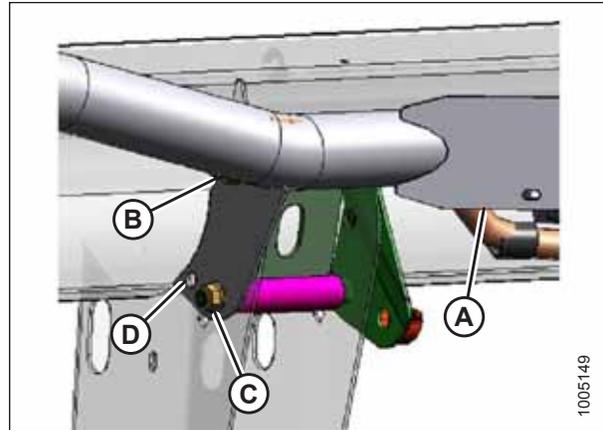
Hose Assembly – 6.1–9.1 m (20–30 ft.) Header Shown
